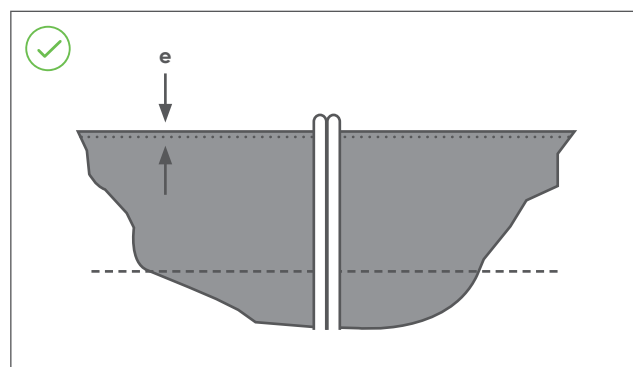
Butt-weld with even welding beads (acceptable)
